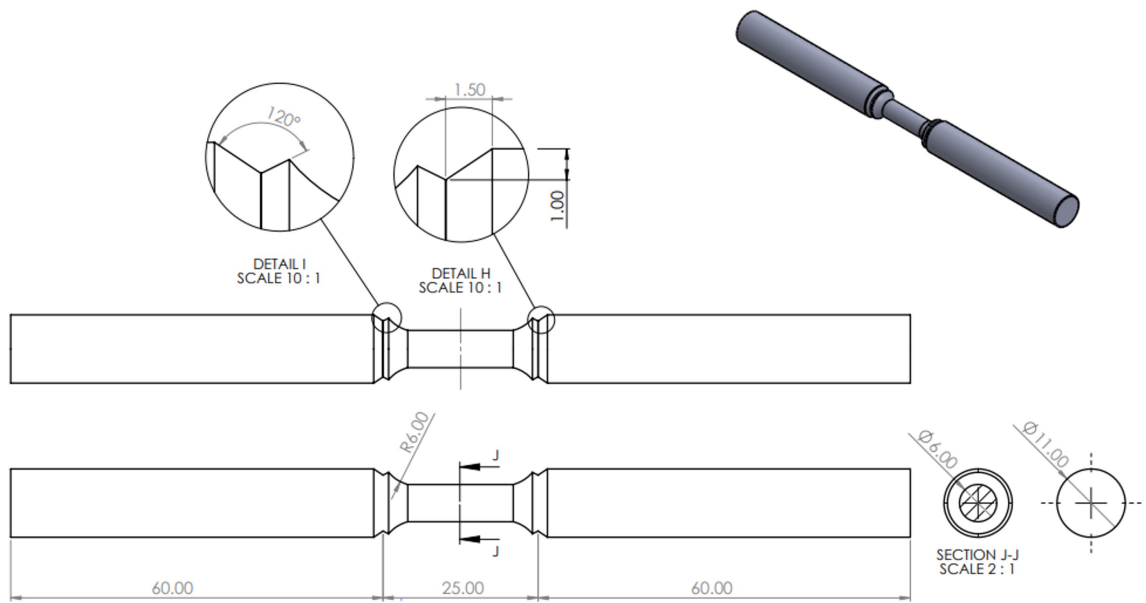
Dimensions of round tensile welded membrane specimens (all dimensions are in mm)
